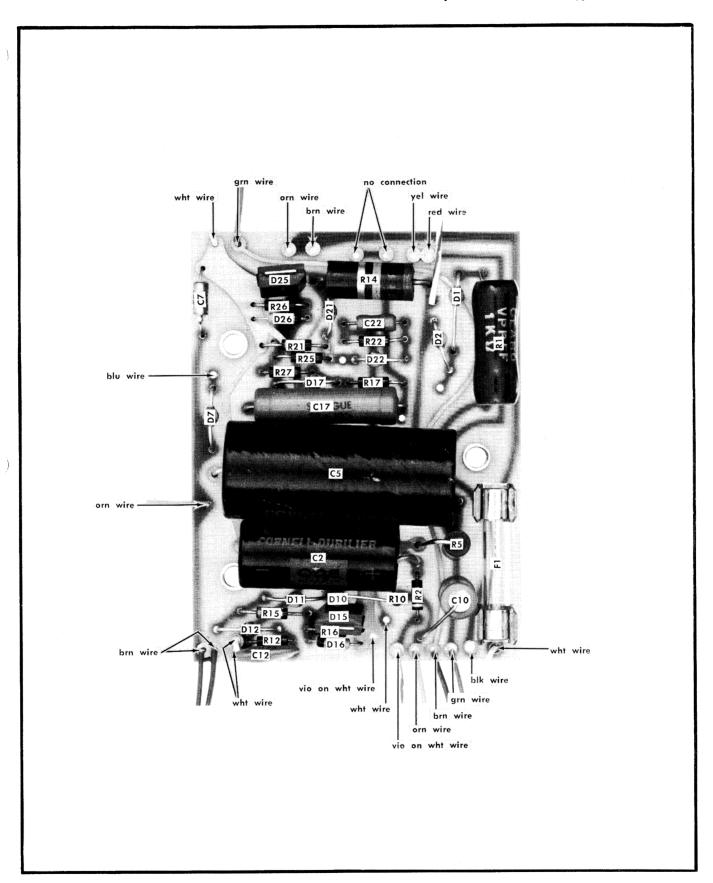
Speedcomputer lower circuit board components and wire color codes.
